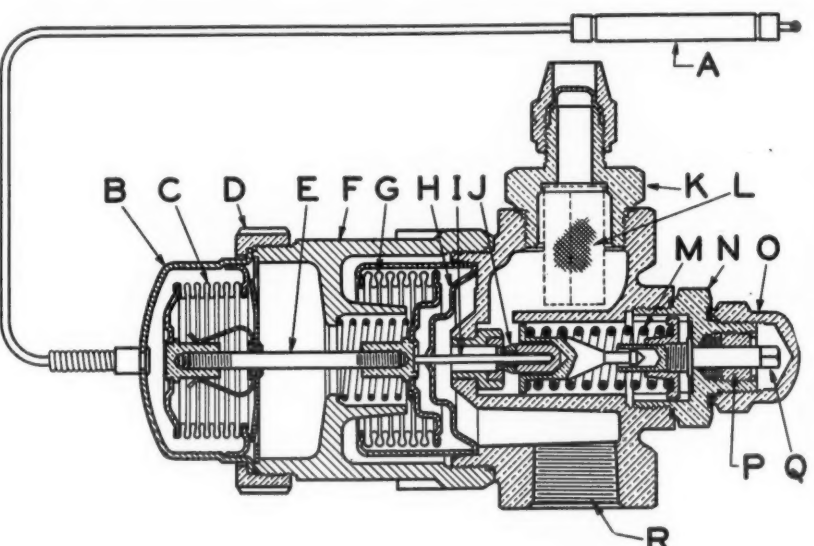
Section of Detroit Lubricator's new 8-ton thermostatic expansion valve: A—Thermostatic bulb. B—Thermostatic power element. C—Power element bellows. D—Hold down nut. E—Stainless steel tie rod. F—Bakelite extension. G—Body bellows. H—Baffle plate. I—Stainless steel push rod. J—"Delubaloy" needle & seat. K—Inlet connection. L—Removable strainer. M—Stainless steel spring. N—Removable body plug. O—Adjustment seal. P—Stuffing nut. Q—Adjusting stem. R—Outlet connection.
